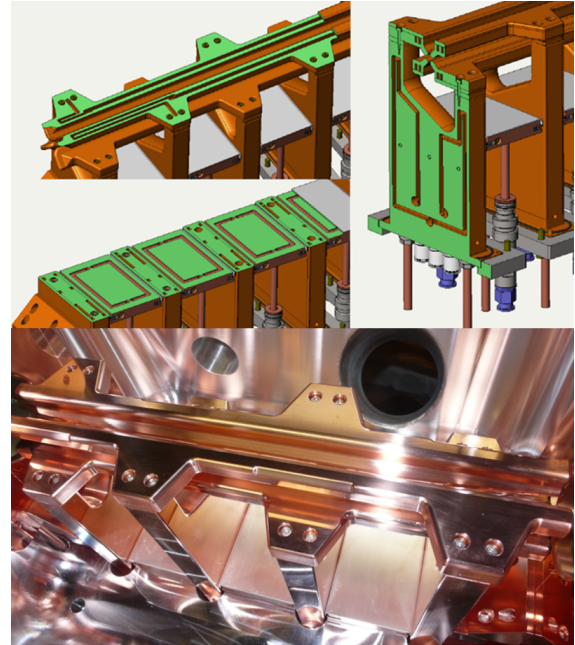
Cooling channels of the 176 MHz RFQ prototype (top), fabricated prototype (bottom).
